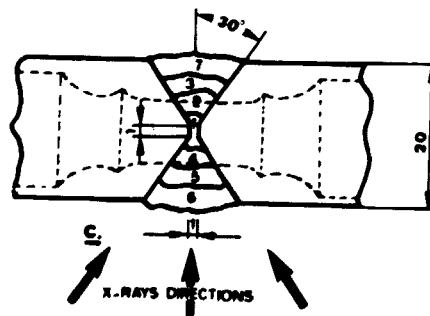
Location of the specimen with respect to the weld layers.
